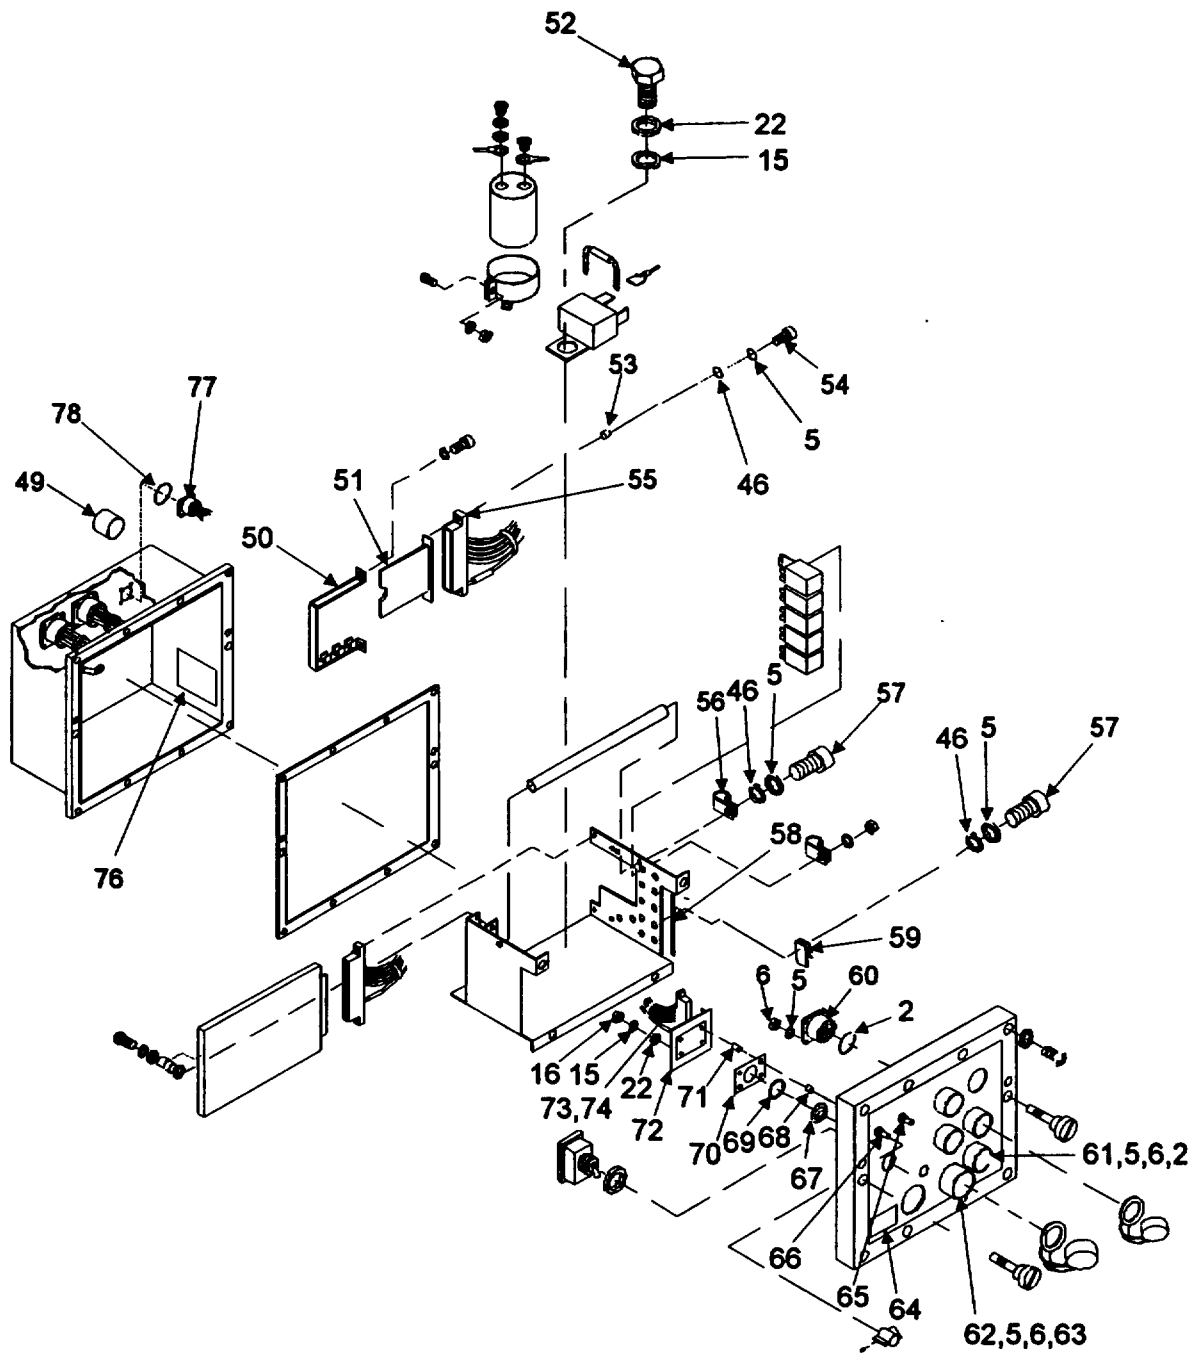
Control Assembly 11784504 (Sheet 2 of 3)
